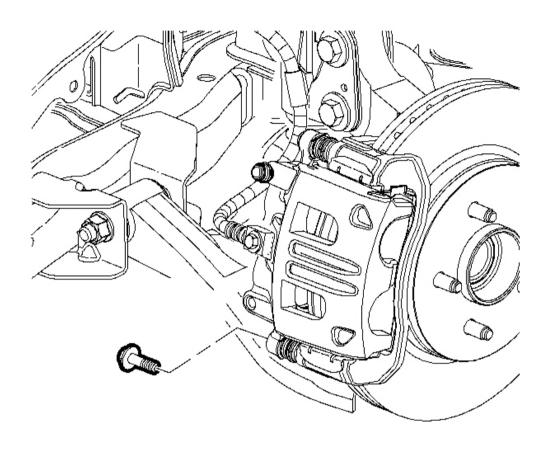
Removing/Installing Brake Rotor To Hub/Axle Flange Courtesy of GENERAL MOTORS CORP.
